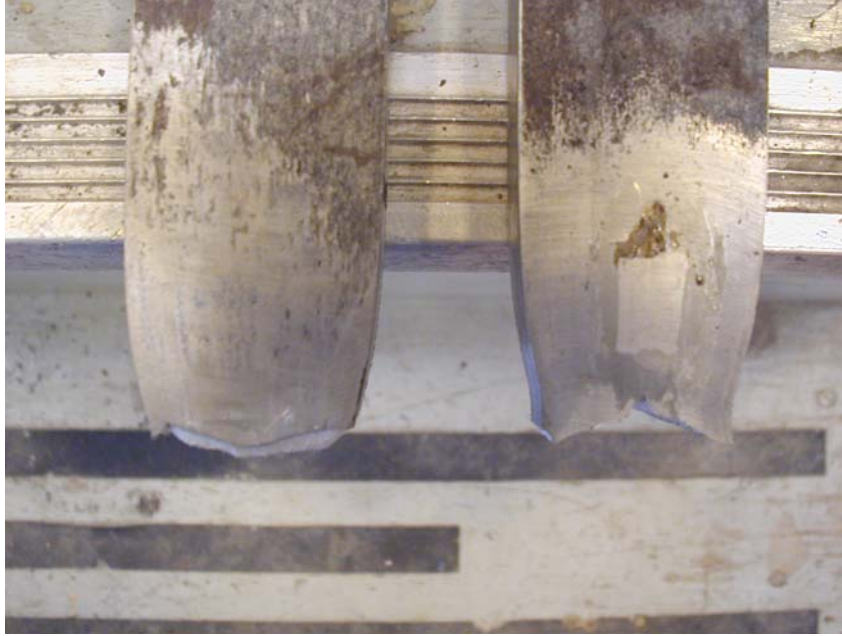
Fracture Surface of Ductile Steel
